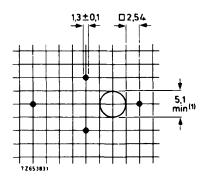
Hole pattern for mounting on a printed-wiring board. (1) Hole for bottom adjustment, if required.
